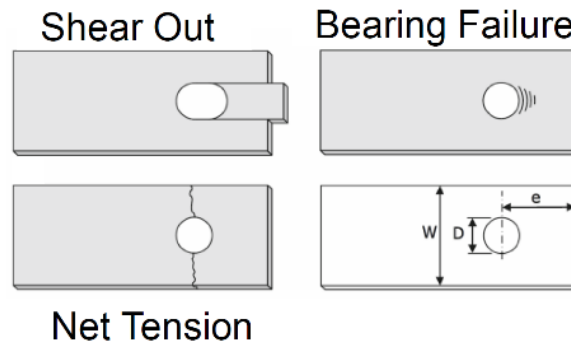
Bearing load failure modes. Bearing failure is ideal
